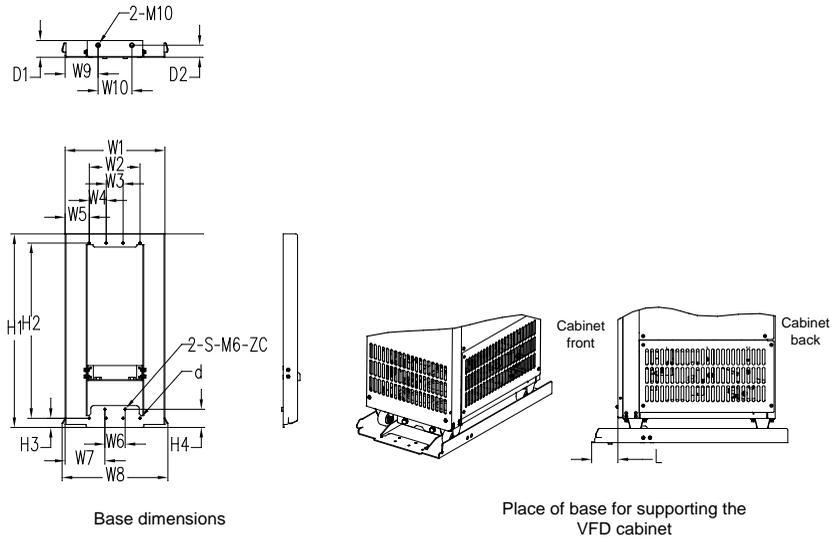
380V 220–630kW VFD base bracket dimensions and mounting dimensions
